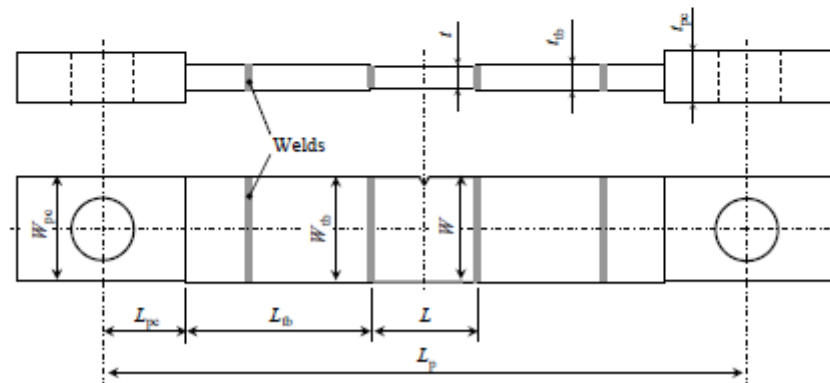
Definitions of dimensions of tab plates and pin chucks
